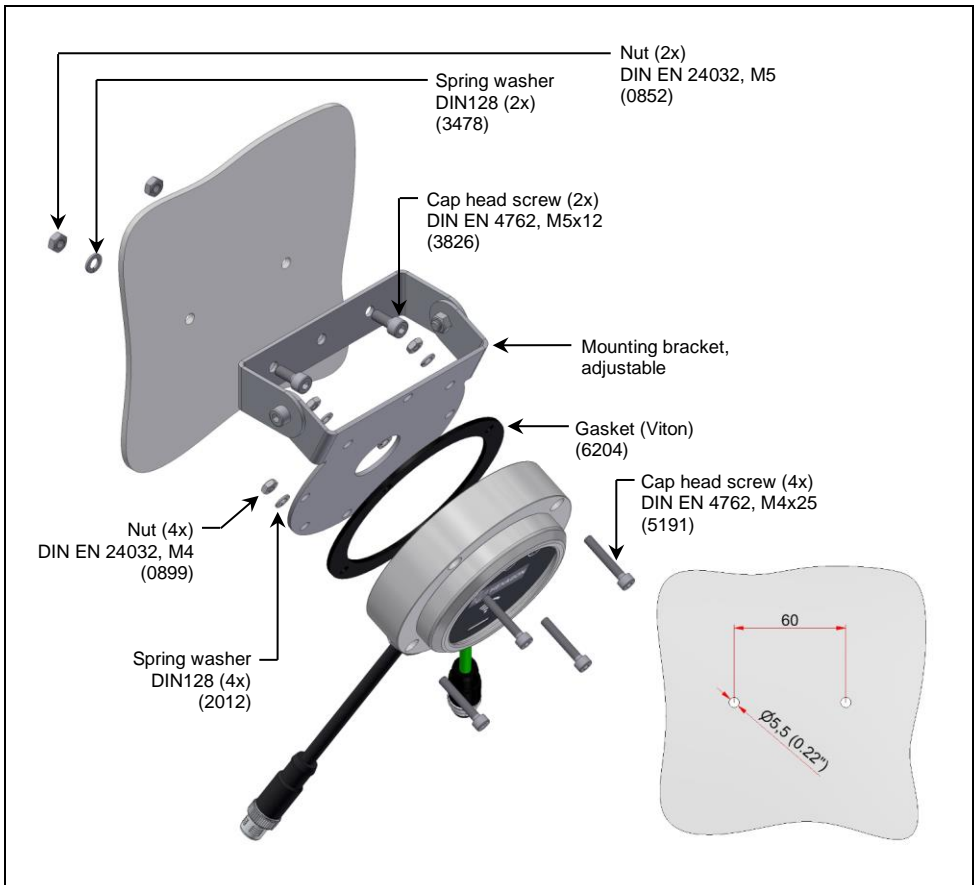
Mounting RC-R-100-R with Mounting Bracket
